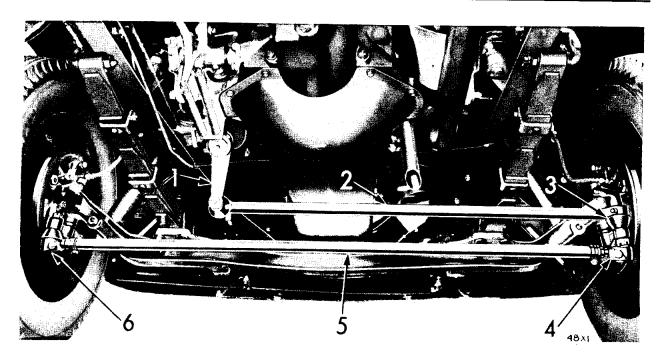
Assembled View of Tie Rod and Drag Link Assembly (B-4-B, B-4-C, B-4-D)
